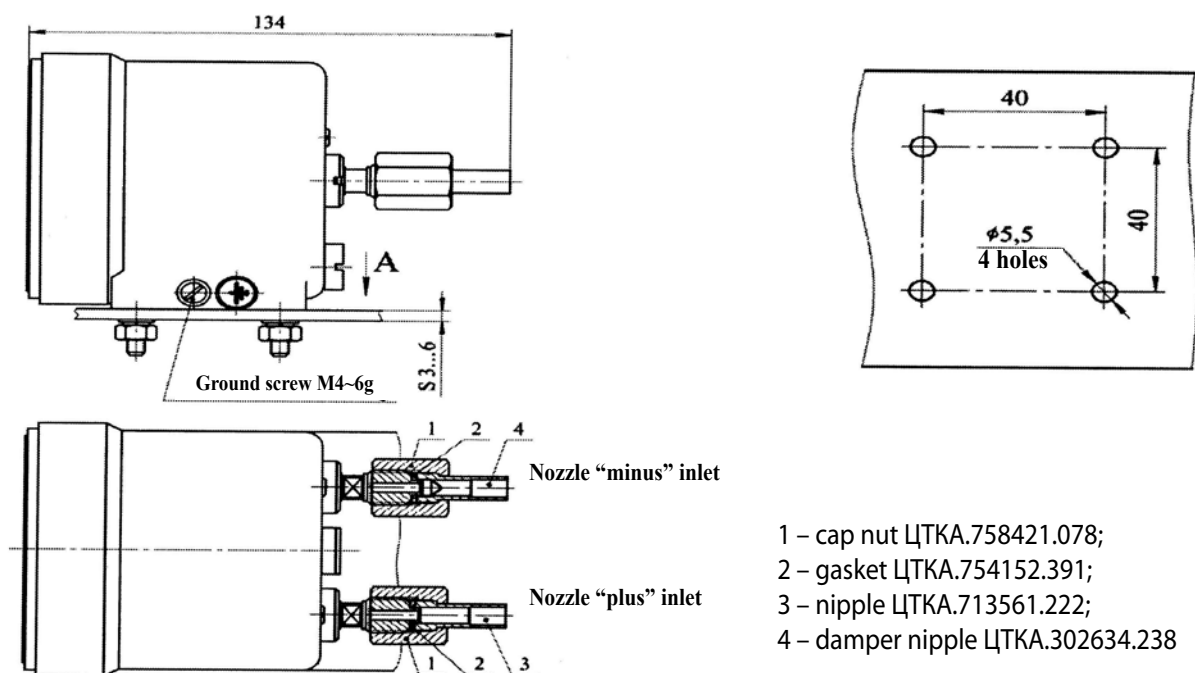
Overall and attachment dimensions of differential pressure gauge ДСП-80 ПАСКО with installation kit
